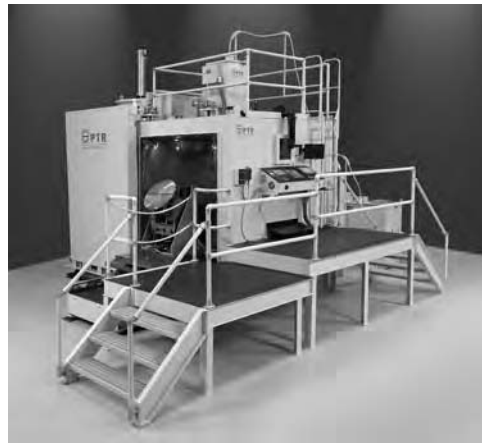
Large-chamber, high-voltage electron beam welding system with fixed gun. Courtesy of PTR-Precision Technologies, Inc., Enfield, CT
